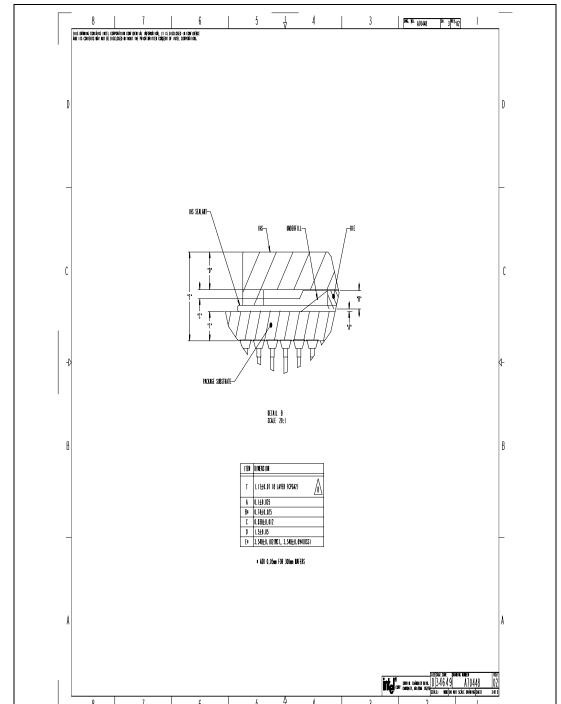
42.5 mm, 604-Pin Package Assembly Drawing (Sheet 3 of 3)
